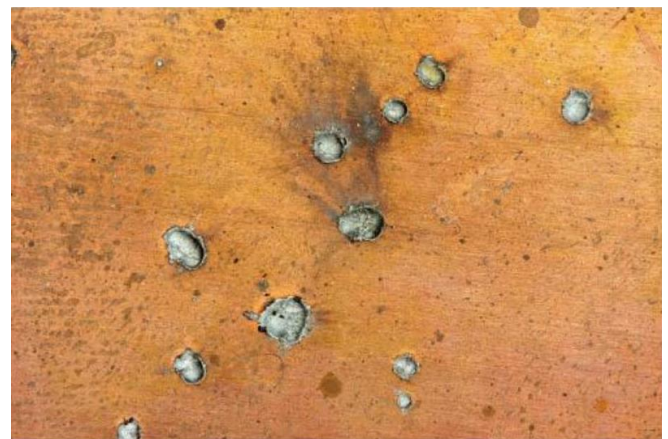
Experimental explosive cladding: aluminum deposited on a copper sheet. Craters are formed explosively [14].
